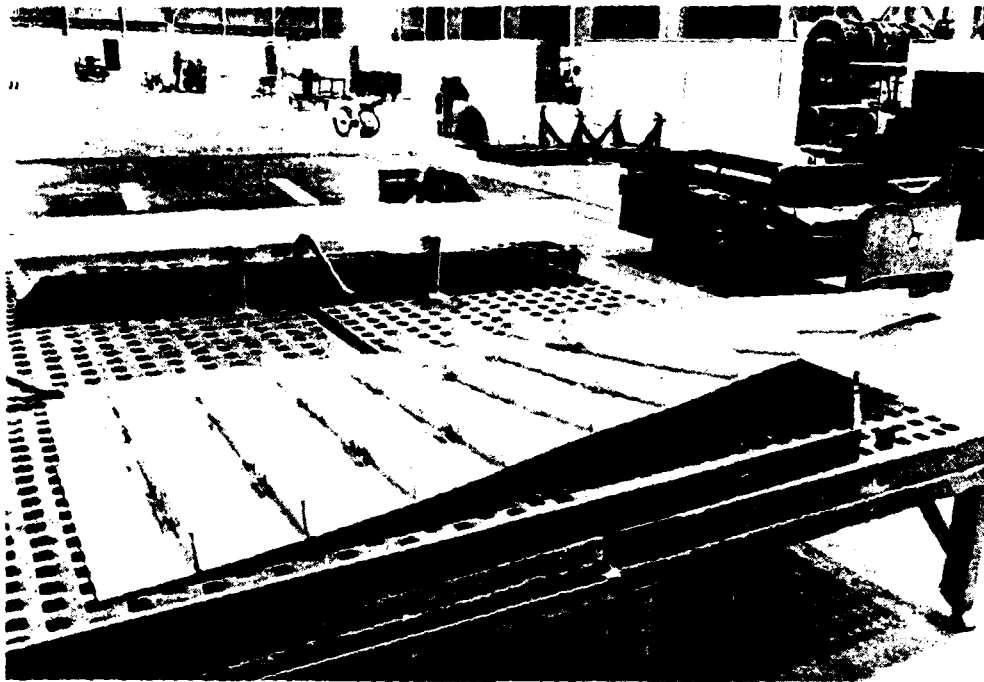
(780451-6) Typical As-Welded Distortion of Stiffened Panel Assembly.
